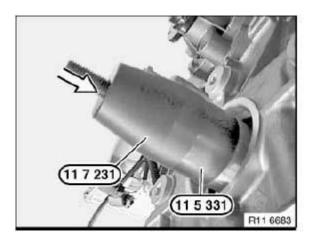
Pushing Special Tool 11 7 231 Onto Special Tool 11 5 331 Courtesy of BMW OF NORTH AMERICA, INC.
